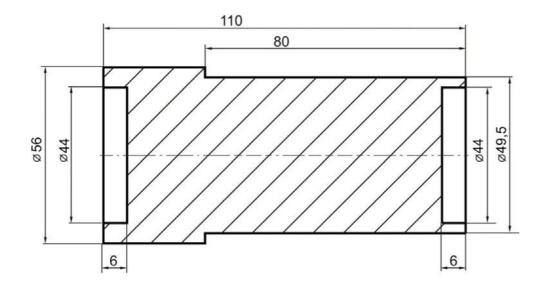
Mandrel for pressing out and pressing in silent blocks of rear springs and brackets (Material - steel 40X (HRC 30-34))
